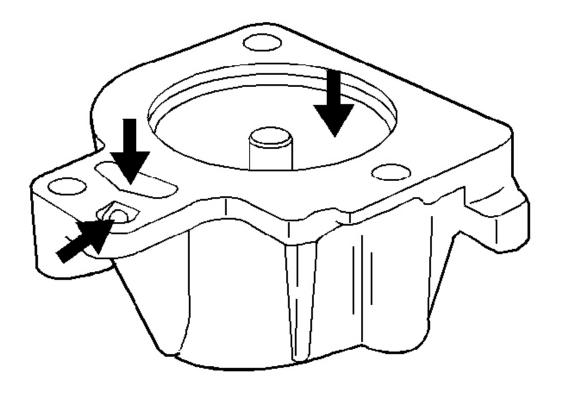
View Of Accumulator Piston Seal & Accumulator Piston Courtesy of GENERAL MOTORS CORP.
